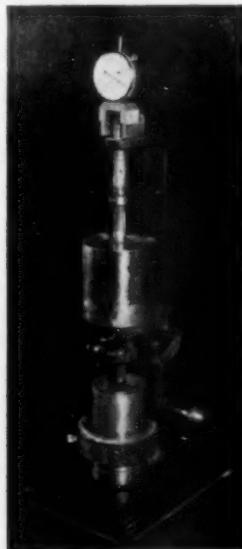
RAMMER WITH SPLIT MOLD IN POSITION AND DIAL GAGE FOR MEASURING SAND FLOW.
